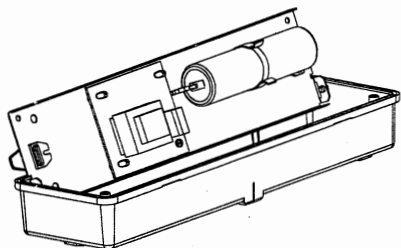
Gear tray assembly (NM version shown & no wiring shown for clarity)
